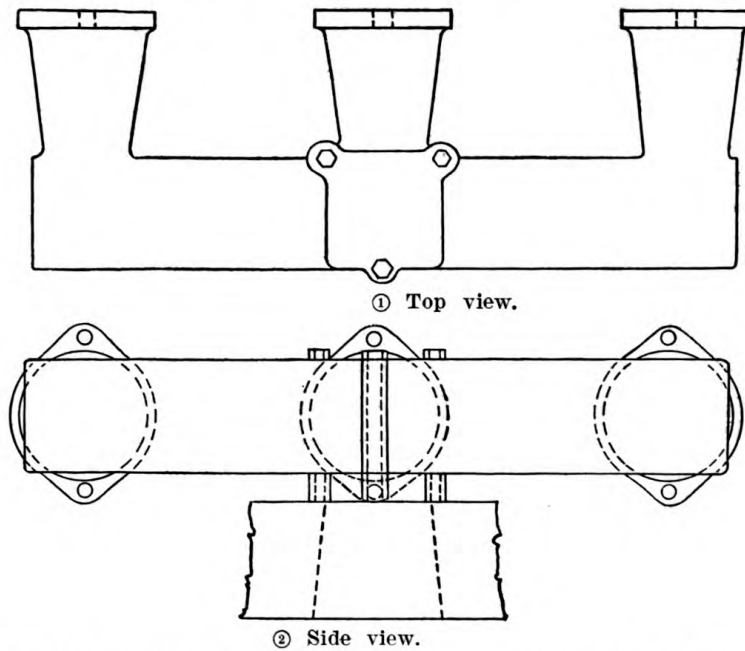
Six-cylinder intake manifold having a square section and square corners.
